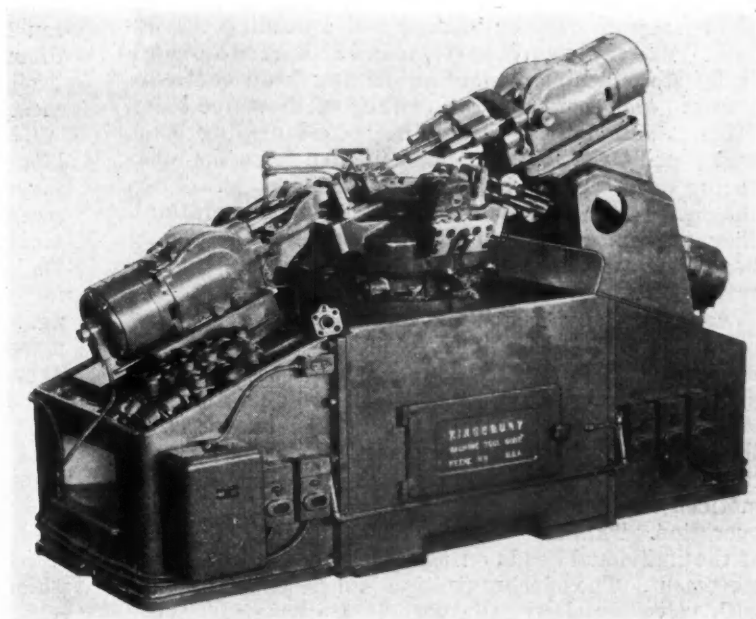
Example of automatic indexing unit type drilling machine. This is designed not only to drill a number of holes but can be arranged for a sequence of operations on the same hole
